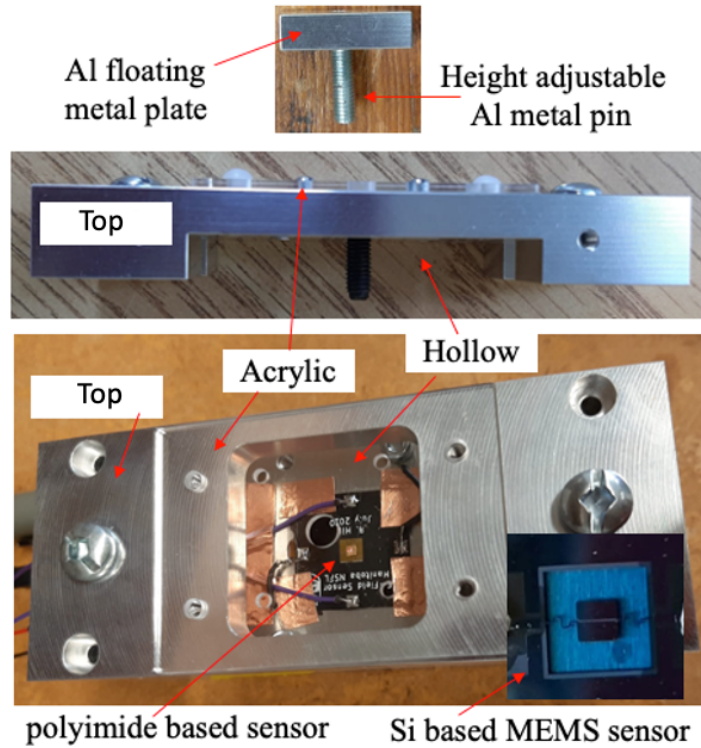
Inner illustration of partially assembled DC electric field sensor enclosure.
